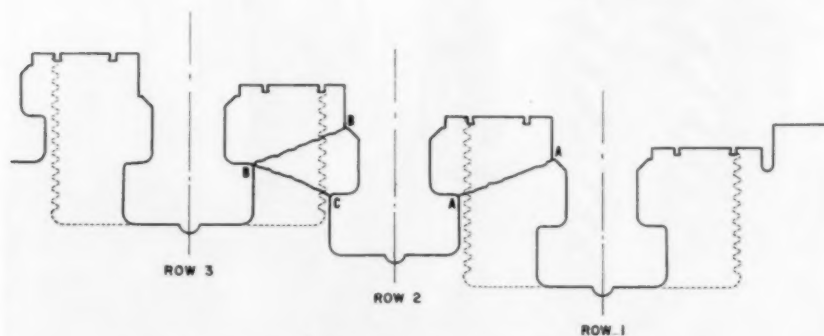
Enlarged section of Weadock rotor showing location of fracture
